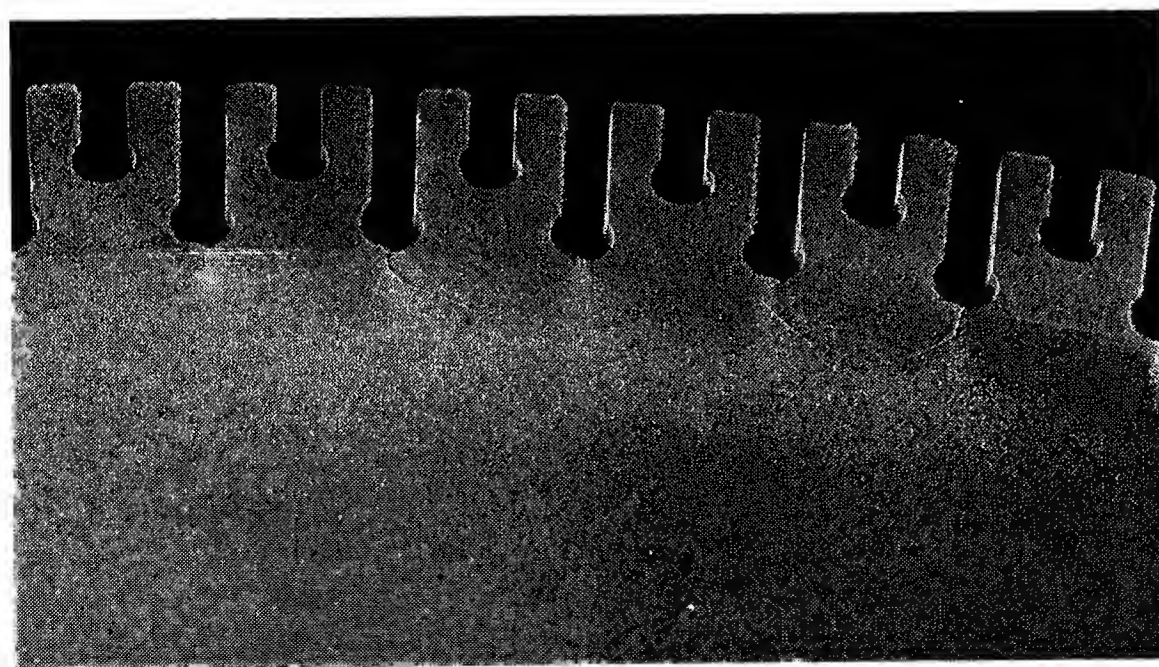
Cracks in turbine bucket-wheel forging revealed by Magnaflux method (Magnaflux Corporation).
